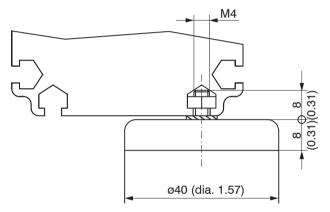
Magnetic holder MH2 - WDS, dimensions in mm (inches)
